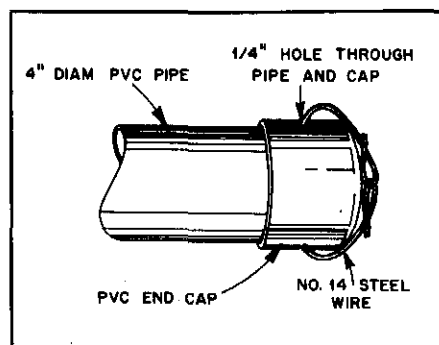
K1KI's crushproof carrier for DXpedition antennas consists of less than \$6 worth of PVC pipe, end caps and wire. This drawing shows one end of the assembly.
